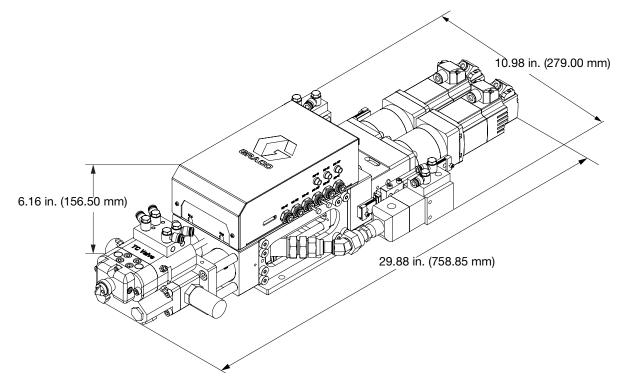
PR-Xv Metering Unit Dimensions, Supply Pump Feed
